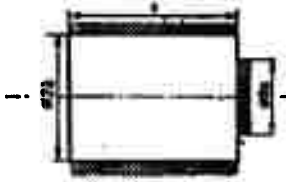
Coaxial disc and ring inside a circular cylinder with impenetrable surface.
